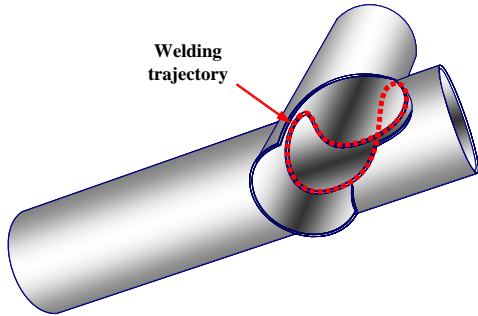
Welding trajectory of monolithic rack housing
